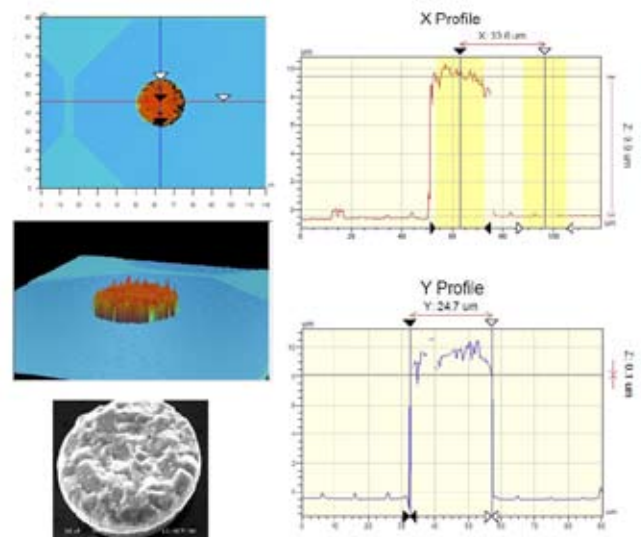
Optical profilometer scan of the solder bumped die, showing the bump roughness.
